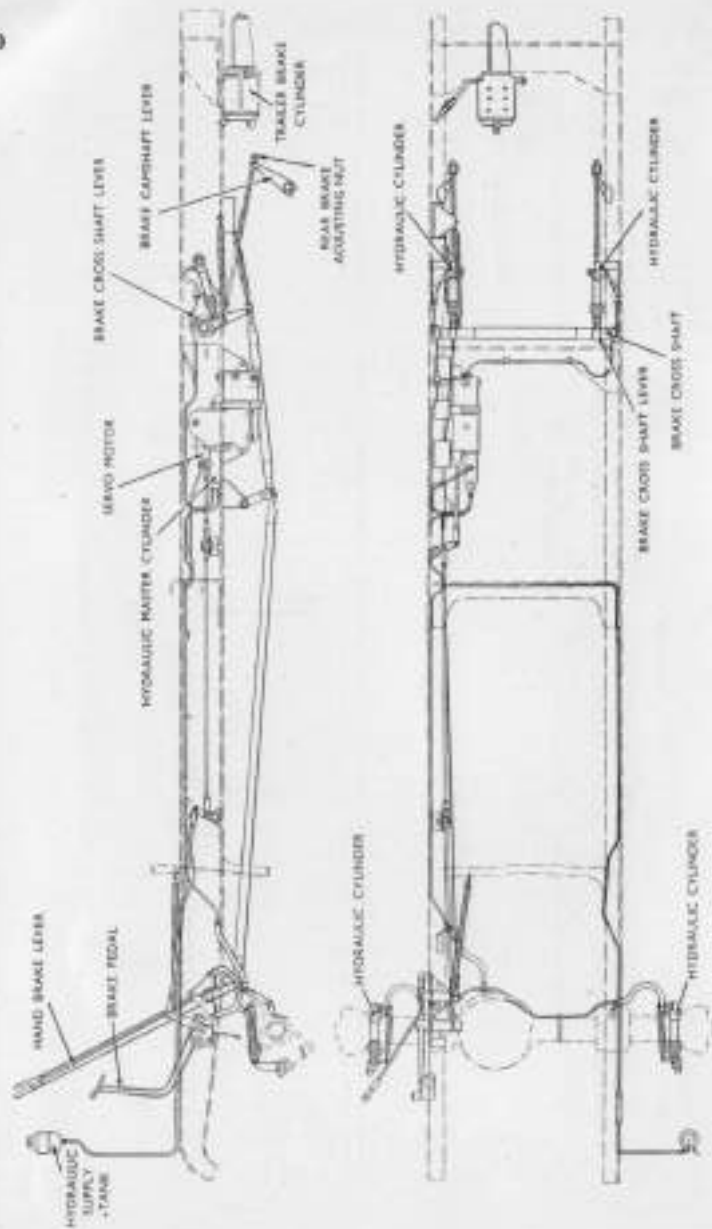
Arrangement of Brake Gear (Hydraulic and Mechanical Rigging)
